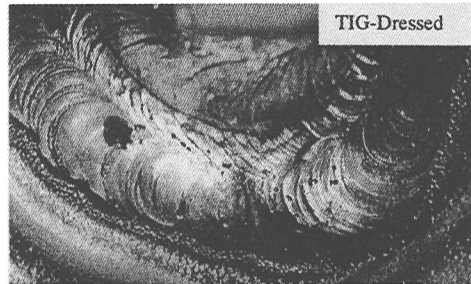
Out-of-plane gusset welded joint specimen
